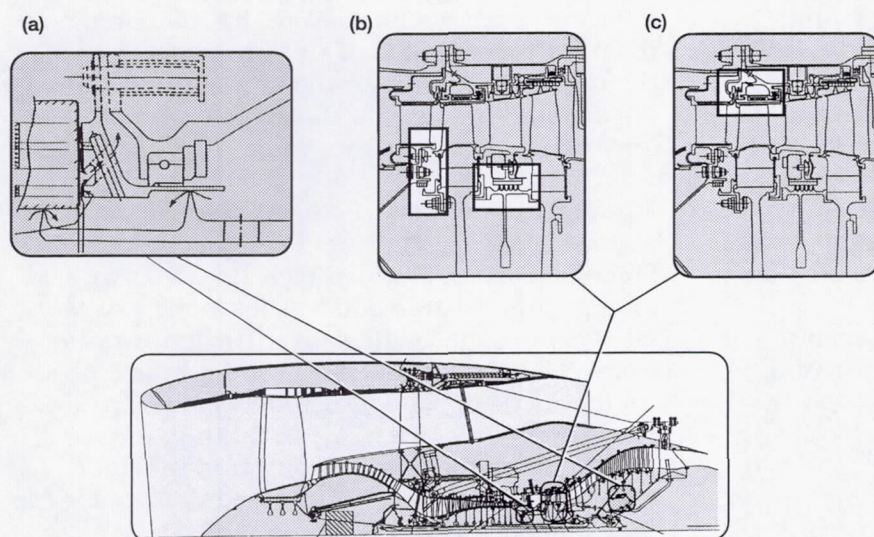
Seal locations. (a) Compressor discharge and balance piston seal locations in face and brush seals. (b) Turbine rim and interstage seals. (c) Blade tip clearance control.
